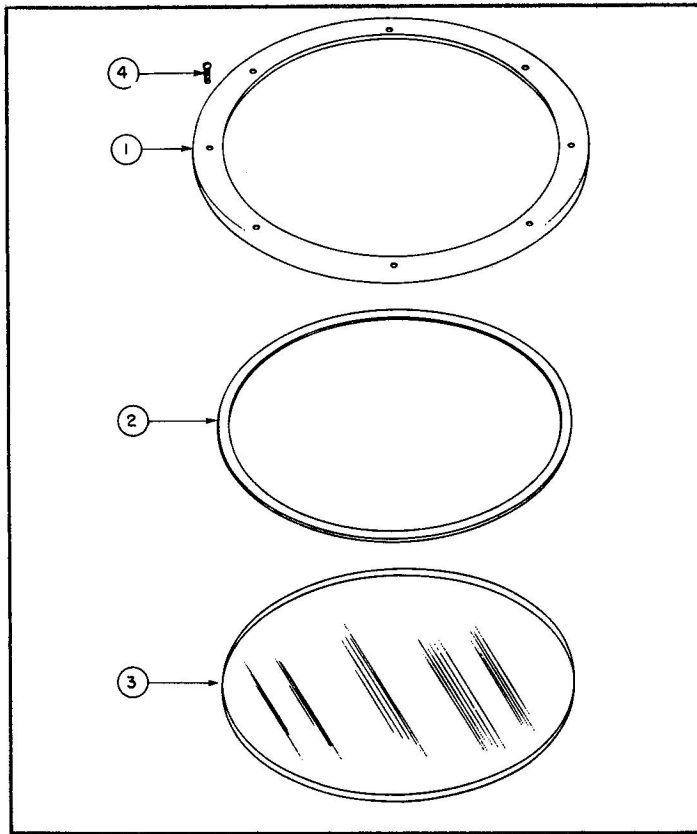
Exploded View - Compass - Bezel Ring Assembly Type D-12
